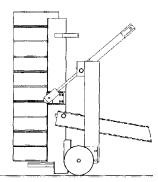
Puck Collecting mechanism side view from CAD model.
